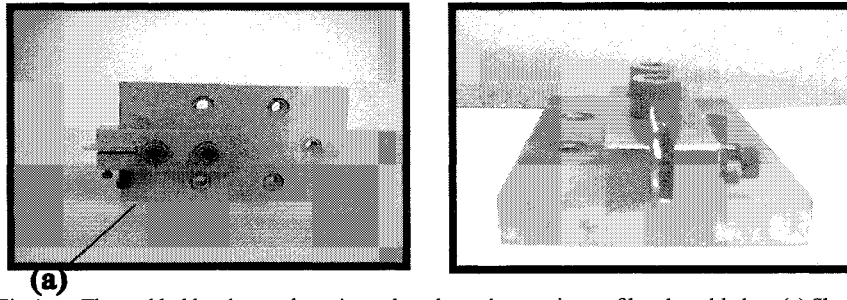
The tool holder shown above is used to clamp the cut pieces of bandsaw blades. (a) Shows where the tool is clamped
